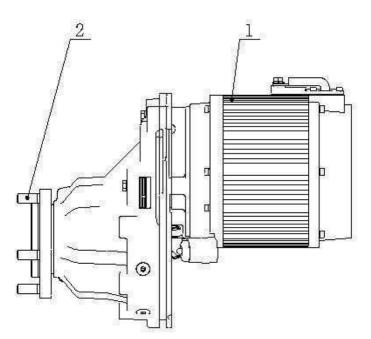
Transport of drive axle 1.Sling position 2.Wheel hub bolt
